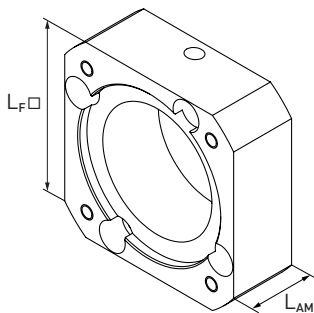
Motor adapter plate AM for linear modules HM-S and linear tables HT-S
